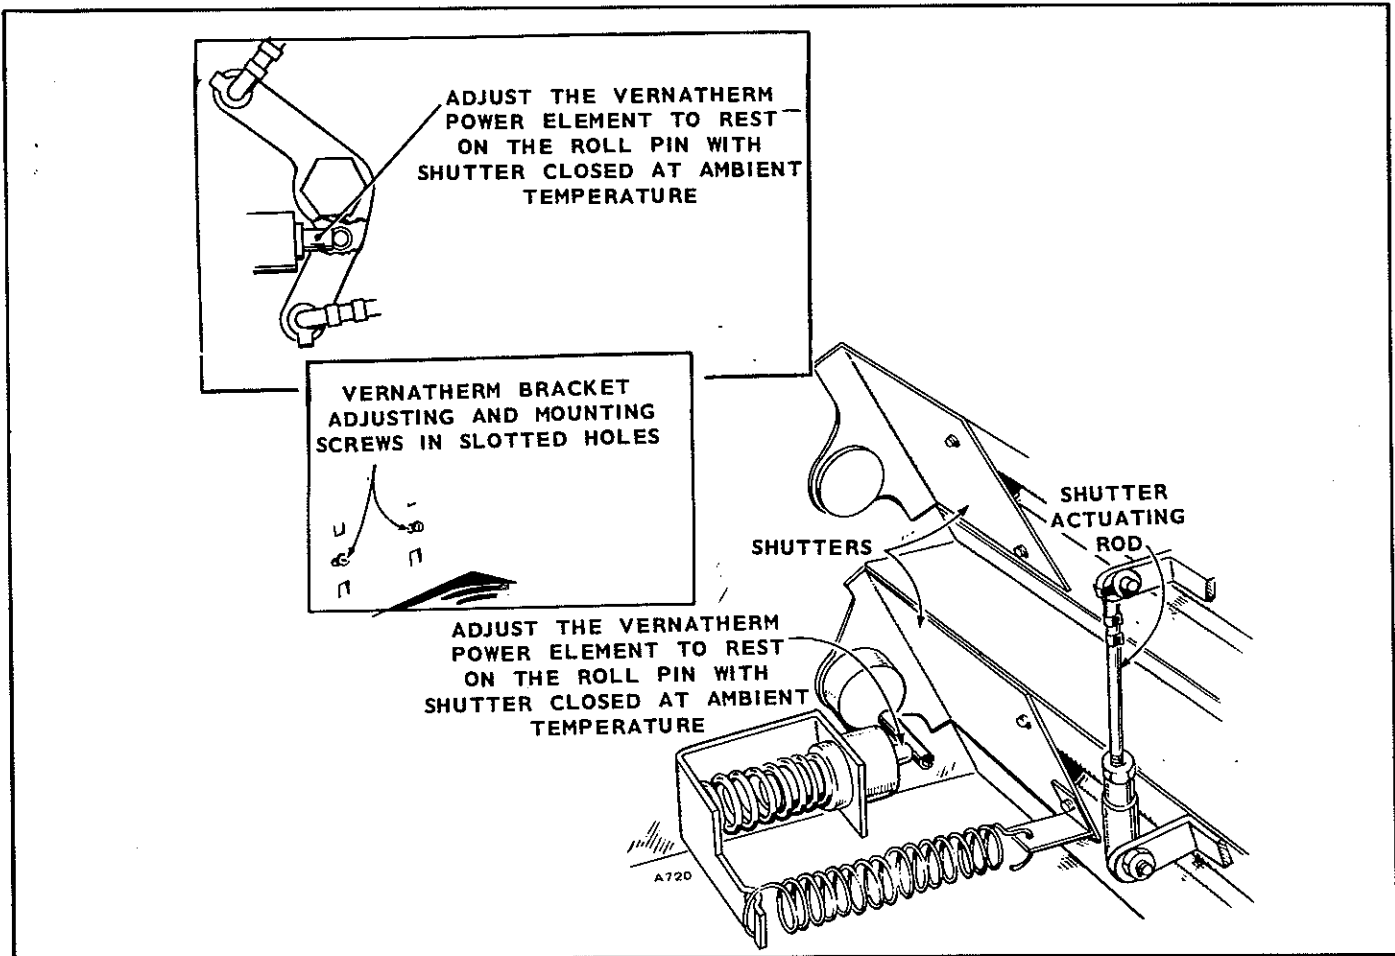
SHUTTER ASSEMBLY AND MECHANISMS
